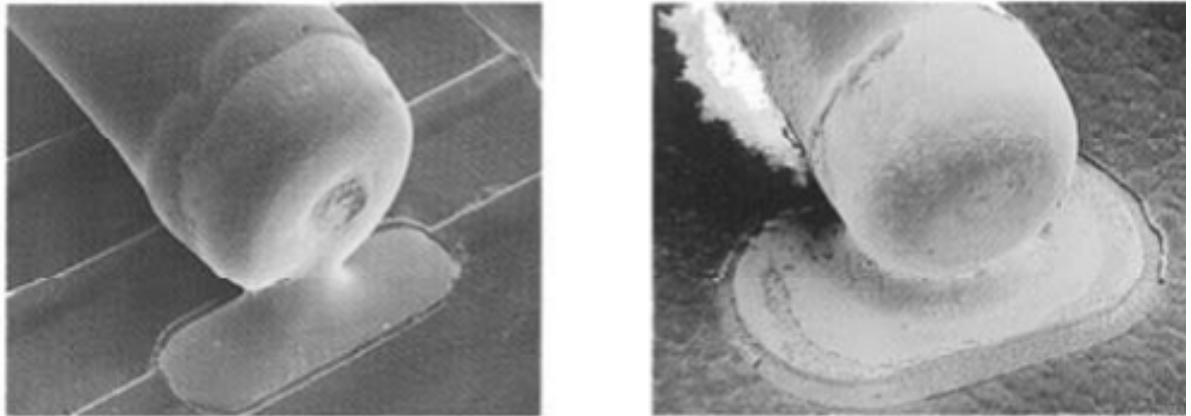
Unacceptable -- Insufficient solder (see also Table 11-3)
